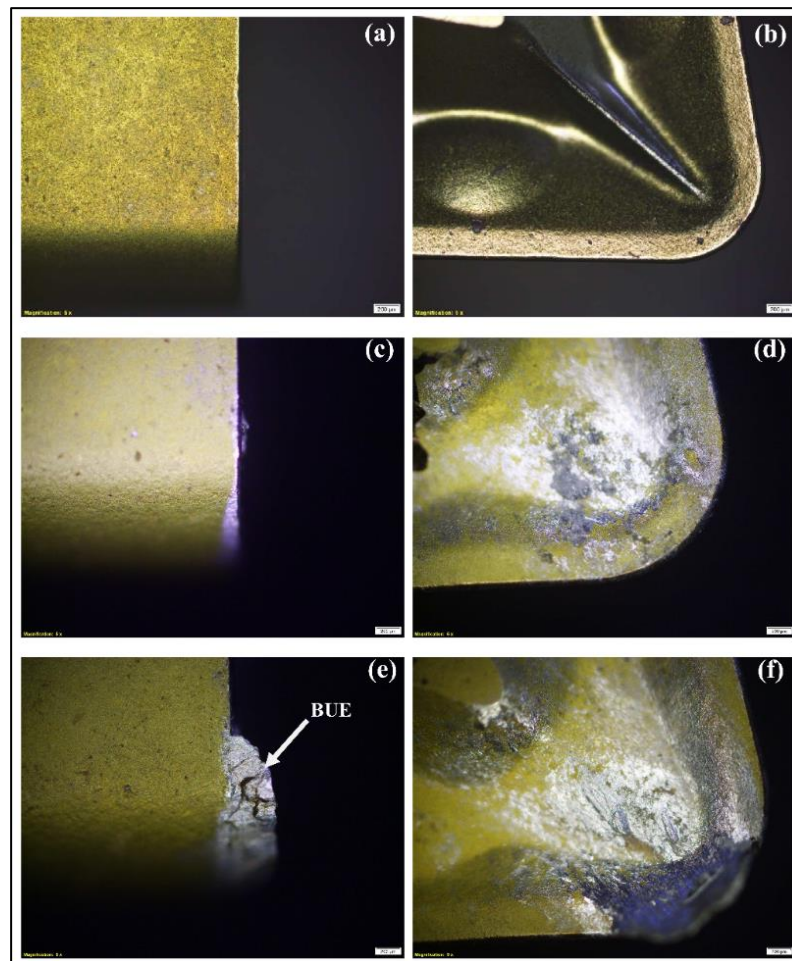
Morphology of tool insert for dry turning of heat-treated composites (a) before cutting: flank (b) before cutting: rake (c) nominal tool wear: flank (d) nominal tool wear: rake (e) Maximum tool wear: flank (f) Maximum tool wear: rake
